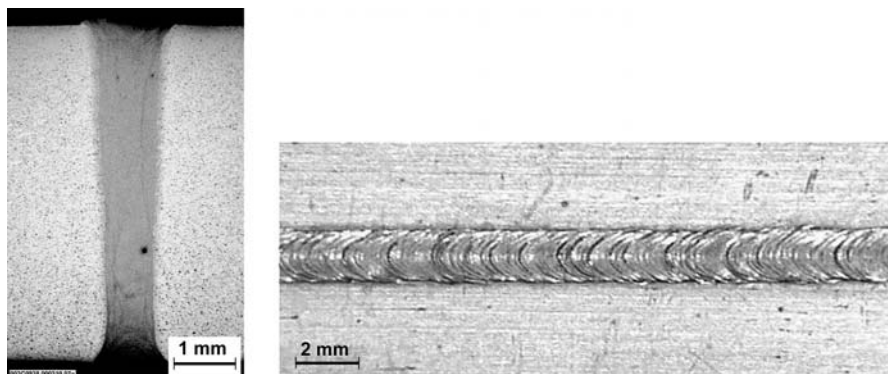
Microsection and top view of laser welded ZK60
